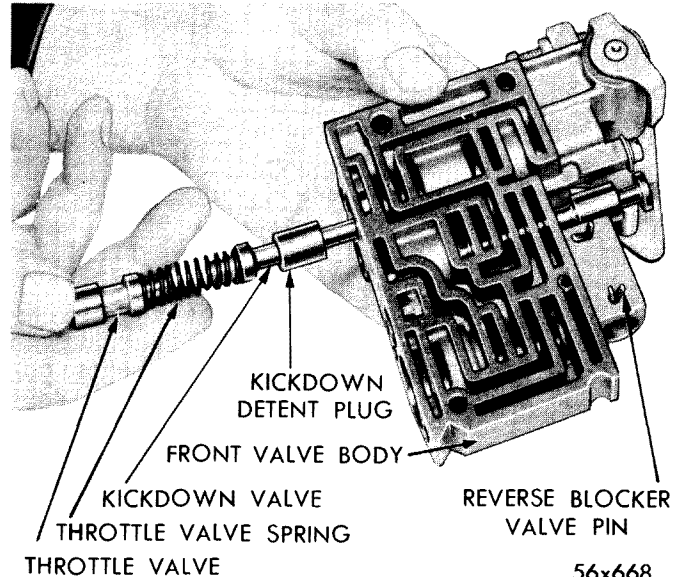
Removal and Installation of Throttle Valve, Spring, Kickdown Valve and Detent Plug
